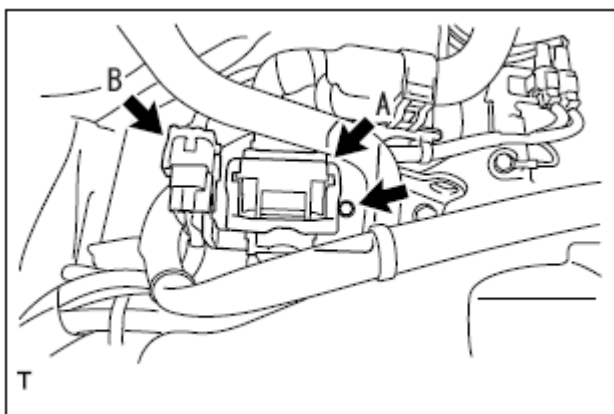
Identifying Wiring Harness Connectors (A And B)
